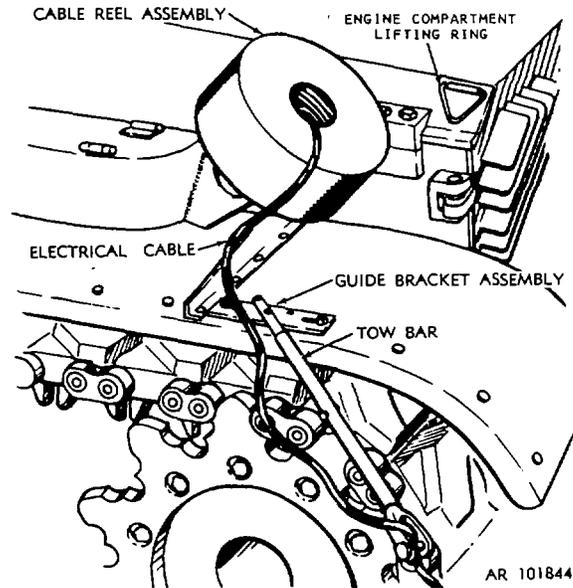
Left rear view of towing vehicle with guide bracket assembly attached.
